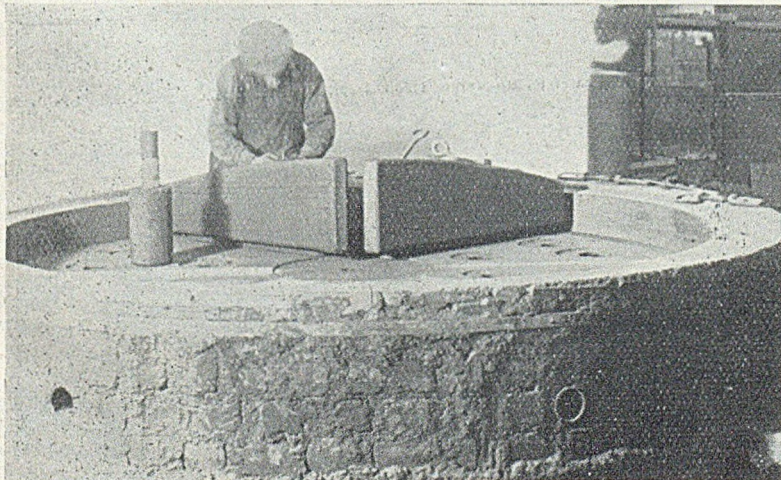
CONSTRUCTION OF A DIE Mould—PLACING THE CORES IN THE DRAG PART.
